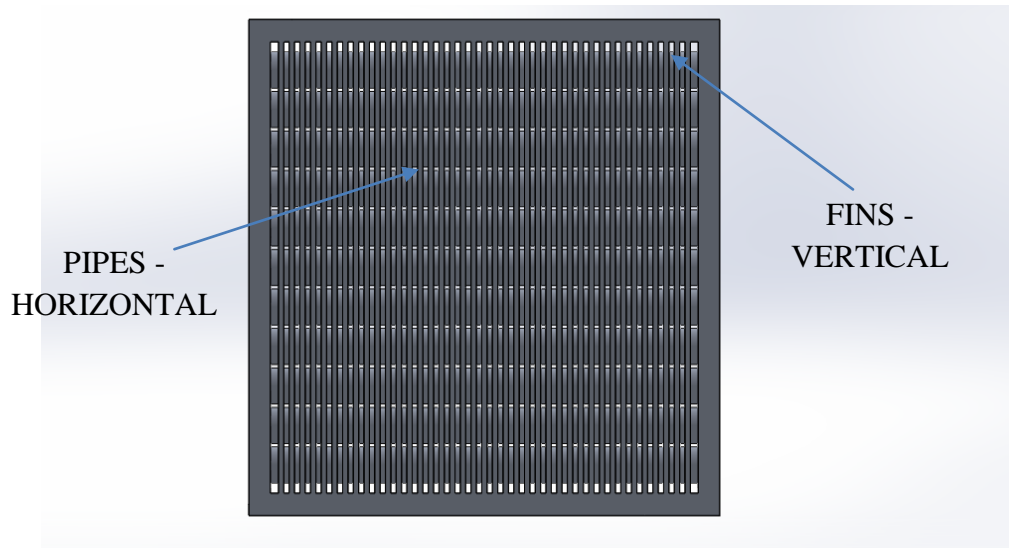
Intercooler and after-cooler schematic with pipes and fins.
